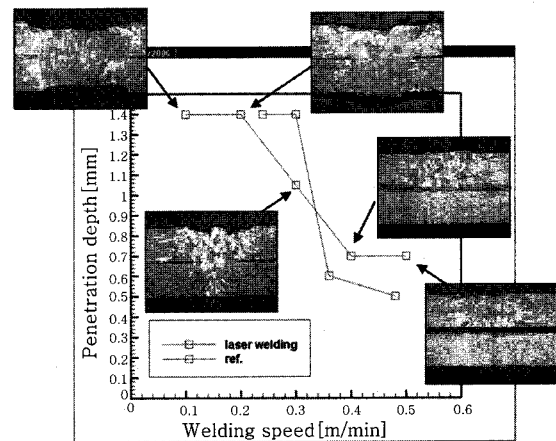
Comparison of penetration depth with respect to welding speed in laser welding
